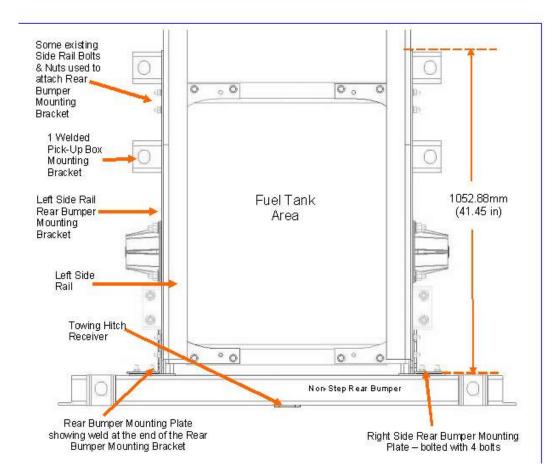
Plan View of Non-Step Rear Bumper and Side Frame Rail Assemblies
